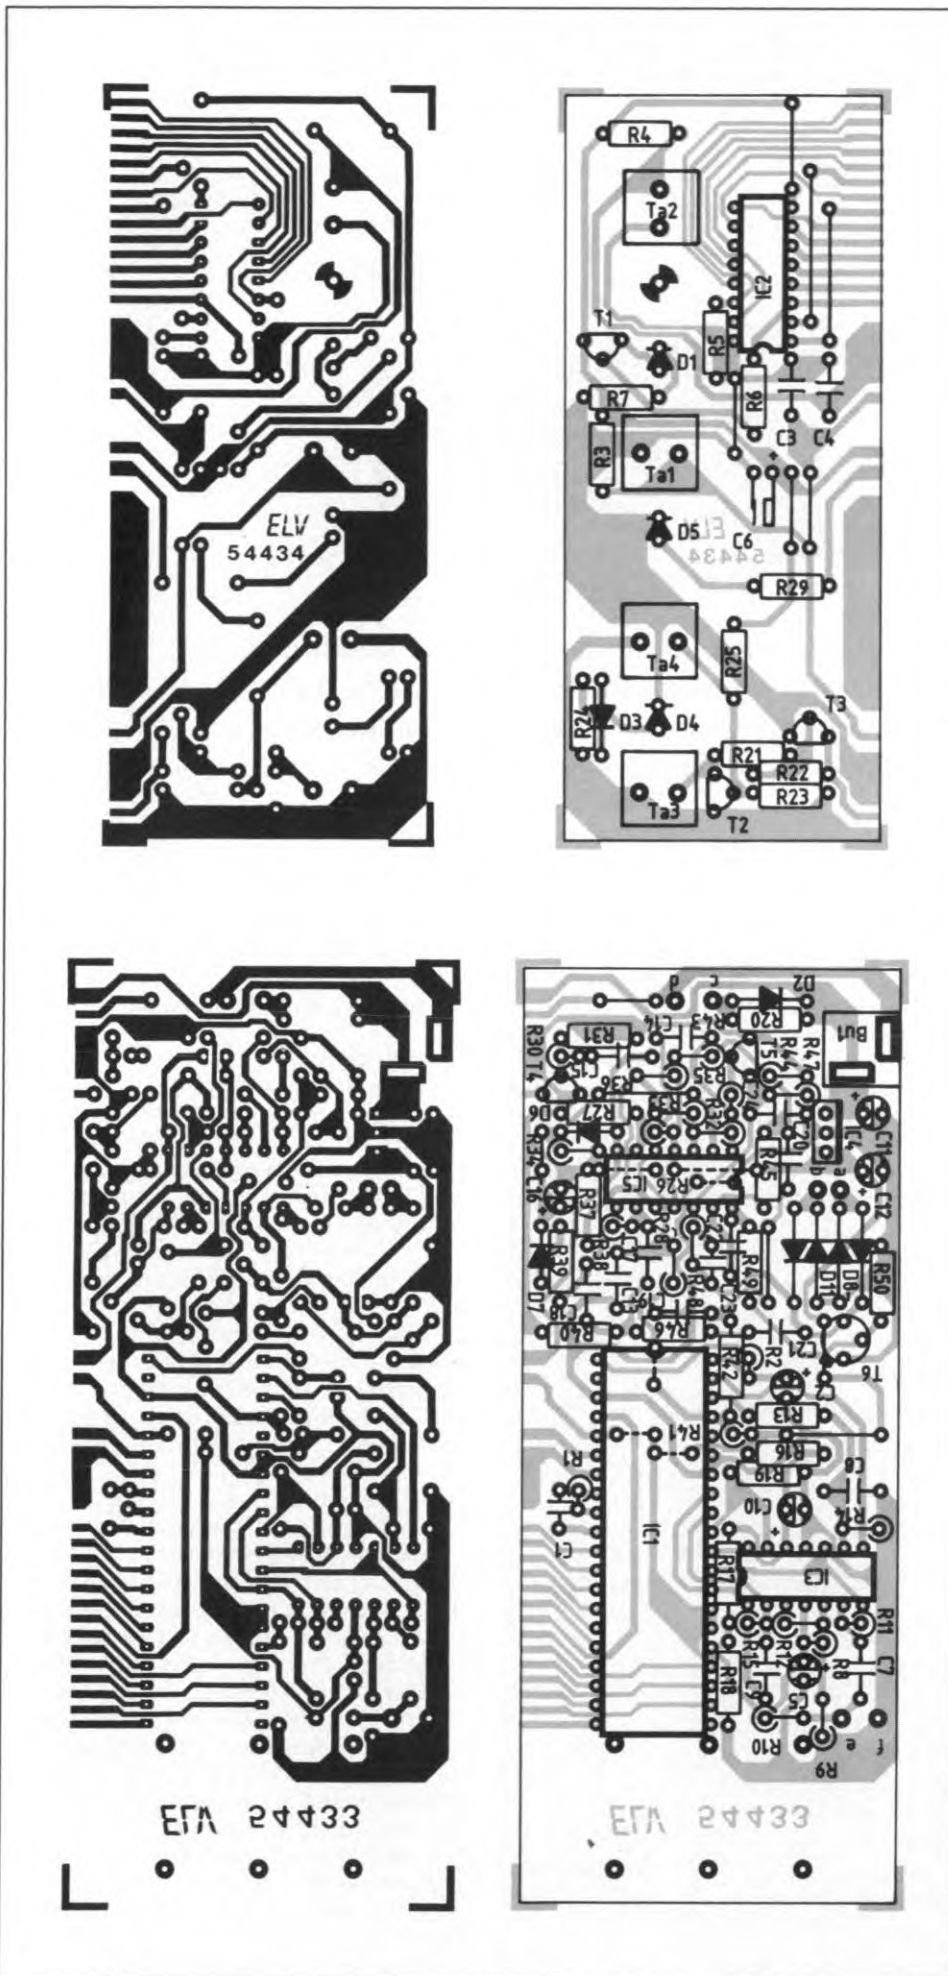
Top views and component mounting plans of the keyboard PCB and the main PCB.
